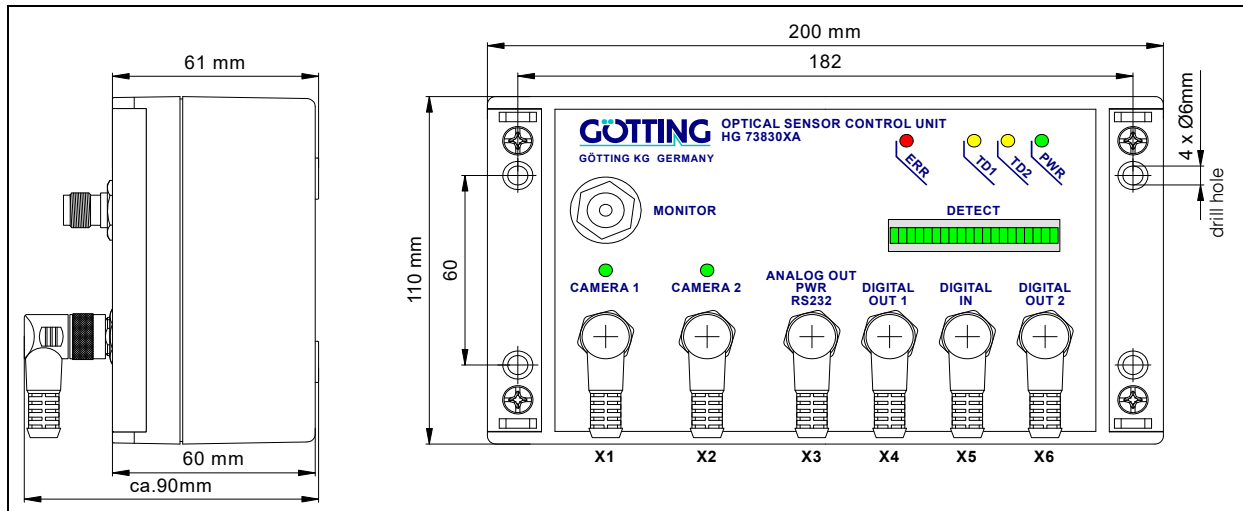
Drawing of the casing incl. dimensions for G 73830XA
